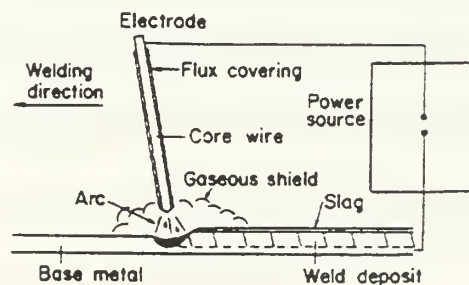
Sketch of shielded metal arc welding process [From Ref. 1].
